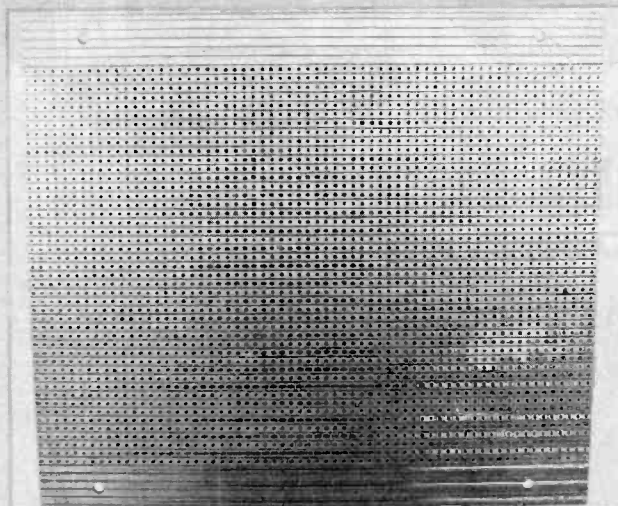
Pierced Vero board with a 0.1" matrix in copper track permits IC assembly or any other type of circuit a technician needs. This type of board eliminates the need to fabricate a PC board of the type shown in Fig. 1.
